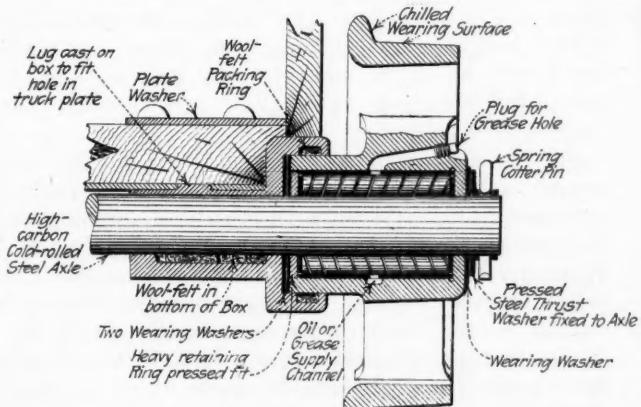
AXLE BOX WITH ROLLER BEARINGS
